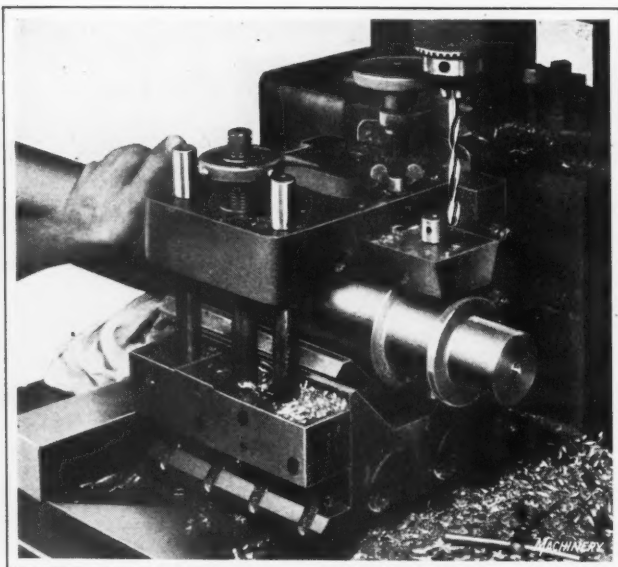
Jig used in drilling and tapping the Locating Key Adjusting Screw Holes and the Taper Lock-screw Hole in Bars
